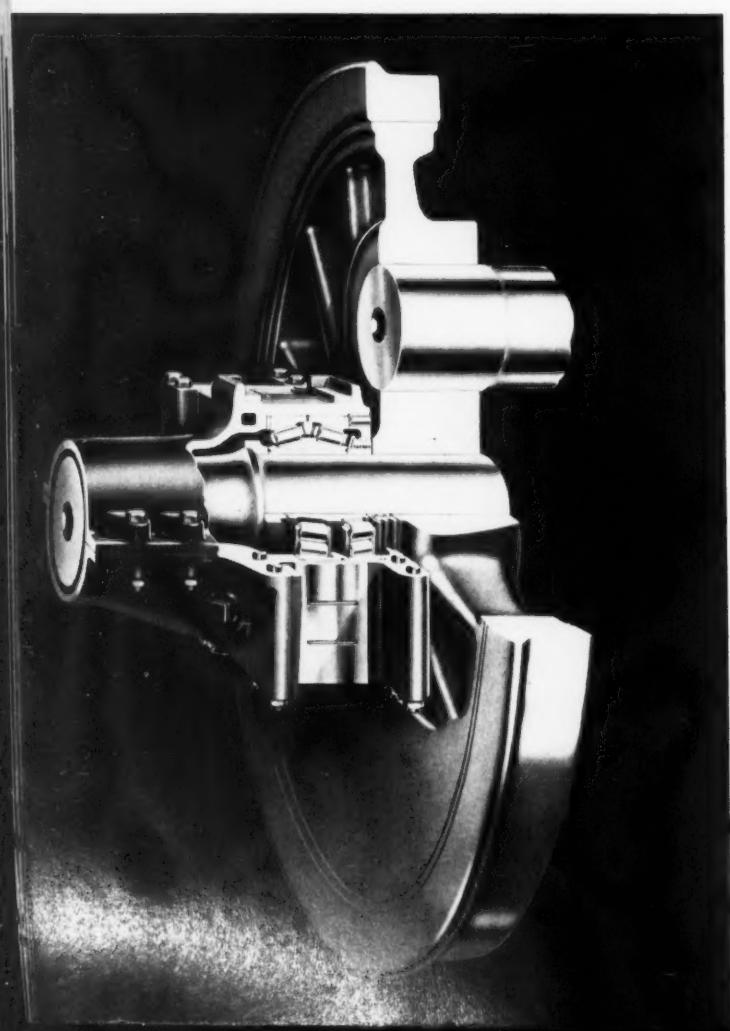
Split Type Tubular Housing with Double-row Timken Tapered Roller Bearings Designed for Application to Steam Locomotive Main Driving Axles
